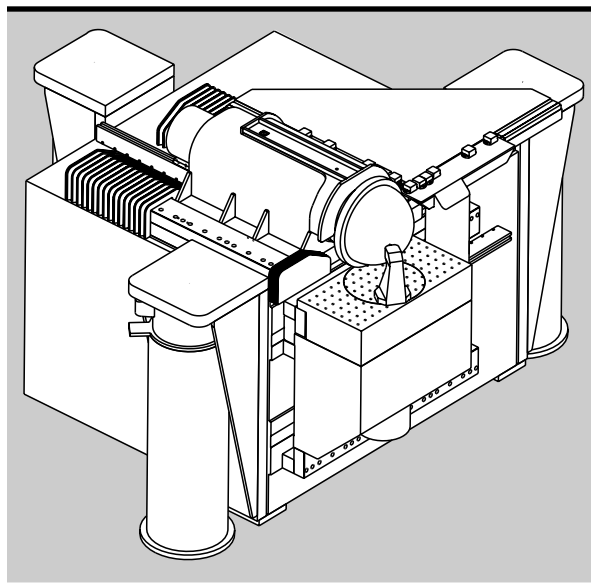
Schematic illustration of ULTRA 350, with air-bearing grinding system and tool slide.
